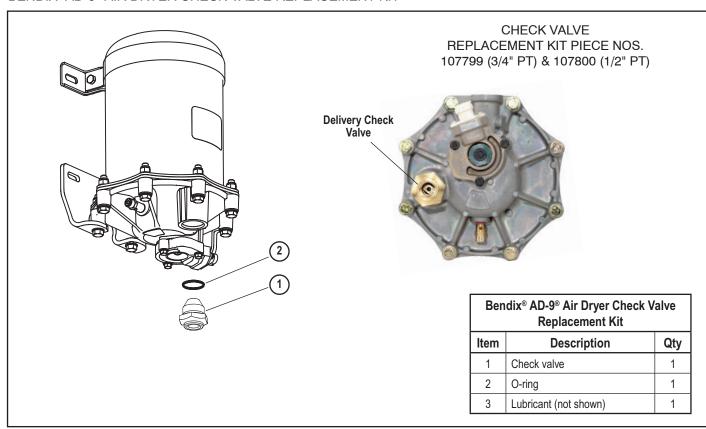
Bendix® AD-9® Air Dryer Check Valve Replacement Kit
